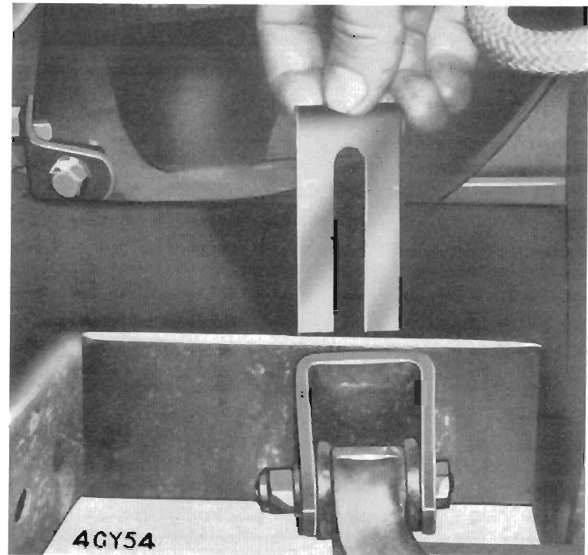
Fitting shims between lower inner fulcrum bracket and chassis frame
